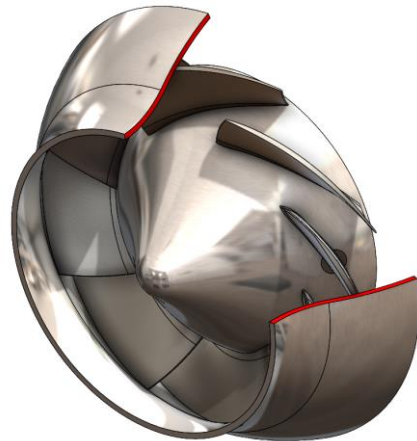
3D model of pump impeller. Blades were manufactured by 3D printing technology
